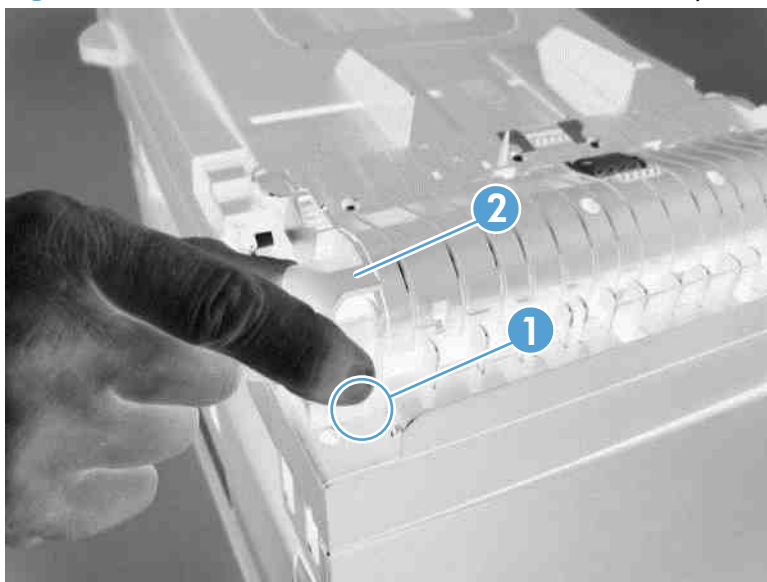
Remove the document feeder core assembly (1 of 4)
